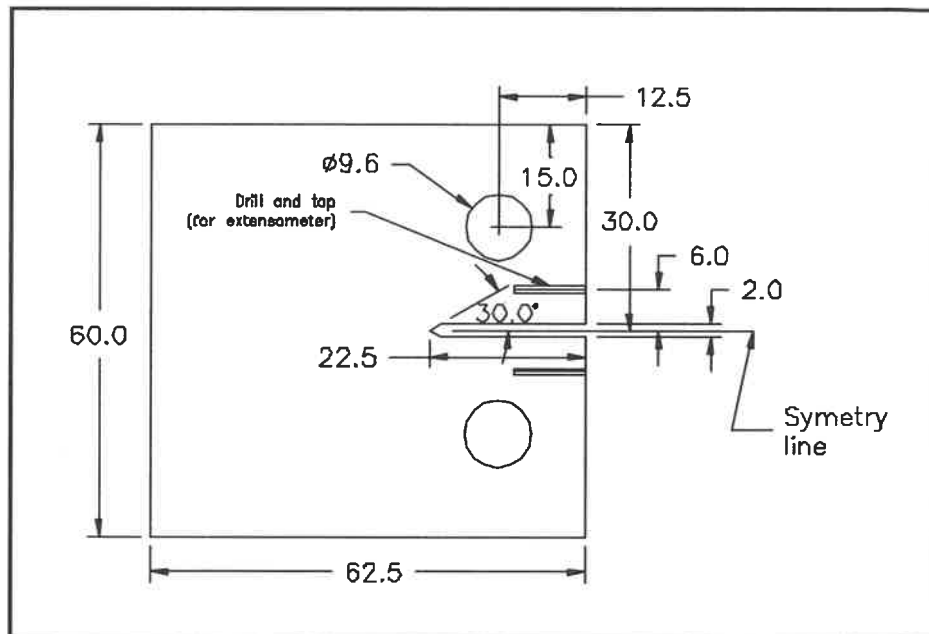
Geometry of the fatigue crack propagation specimens (all dimensions are in millimeters).
